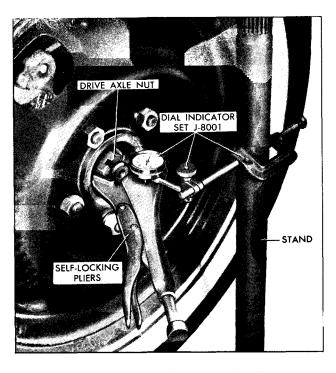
Checking Spherical Joint End Play (Eldorado)
